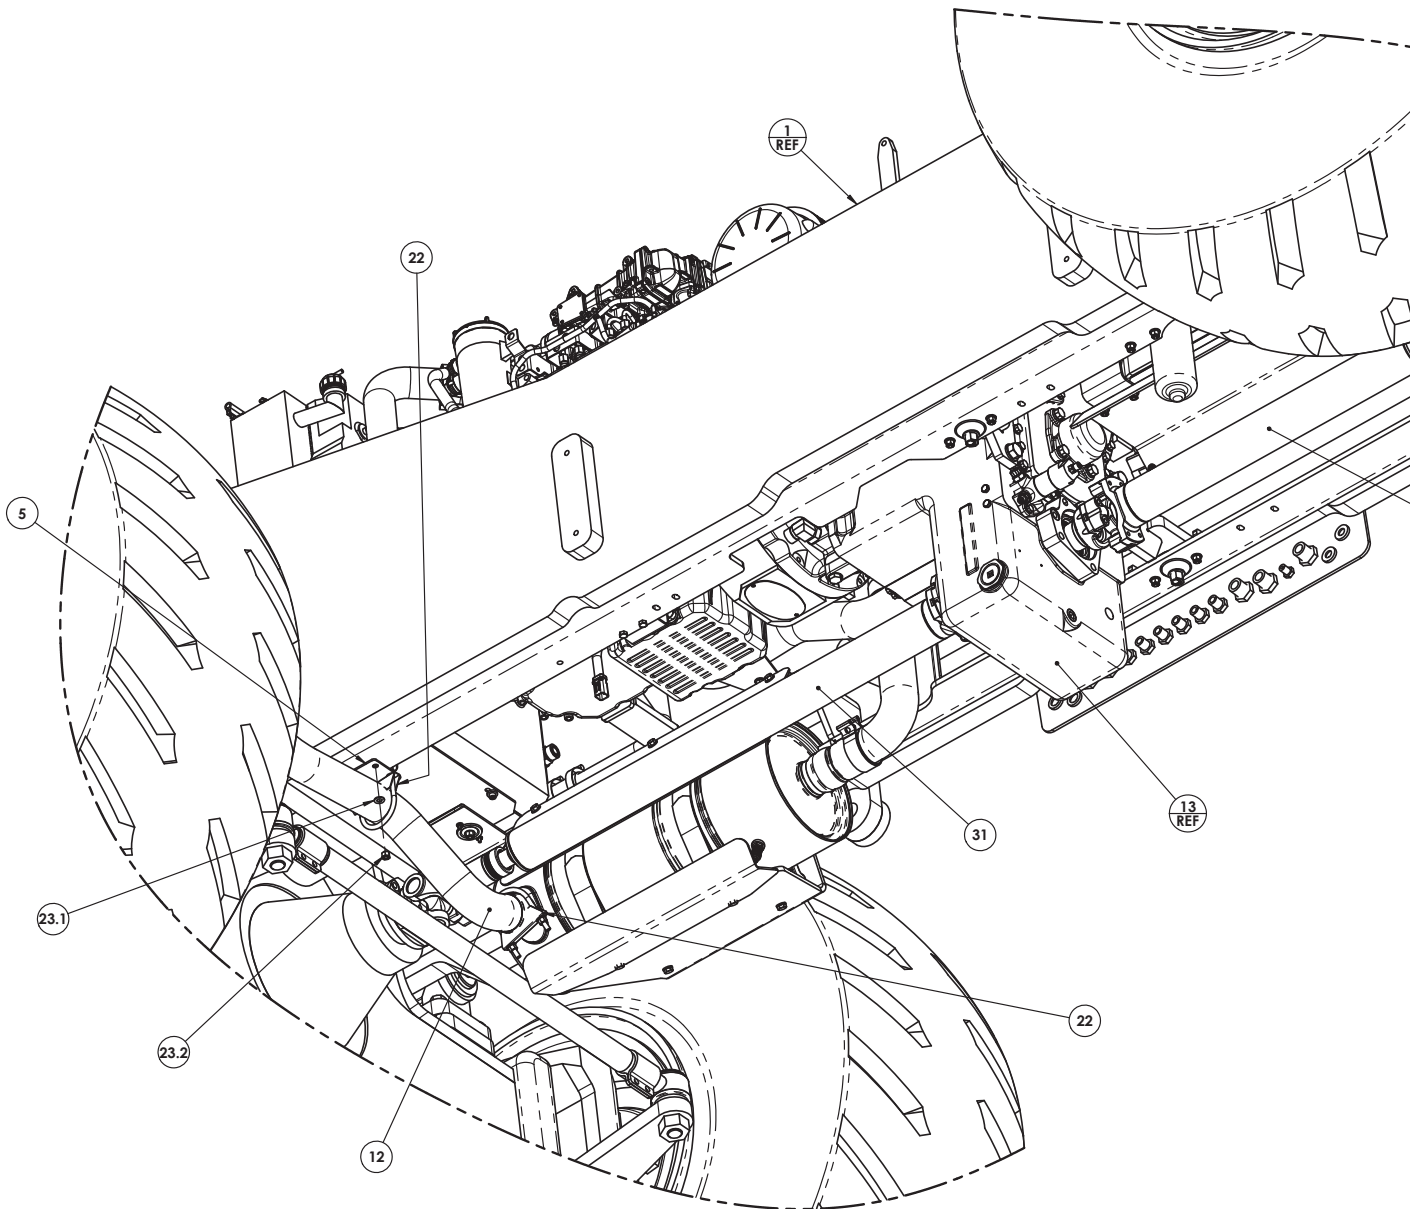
CHASSIS ASSEMBLY - ENGINE (32003-000)
